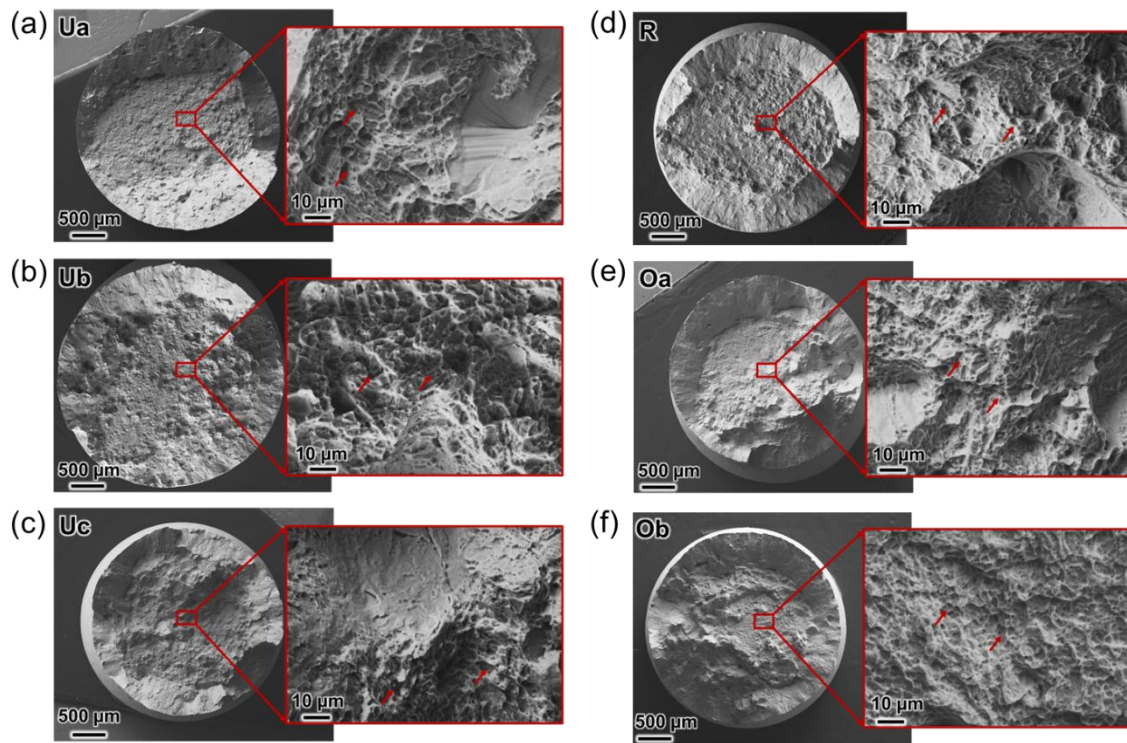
Tensile fracture surfaces of L-PBF Ti-6Al-4V specimens fabricated using different process parameters. The dimples are indicated by red arrows.
